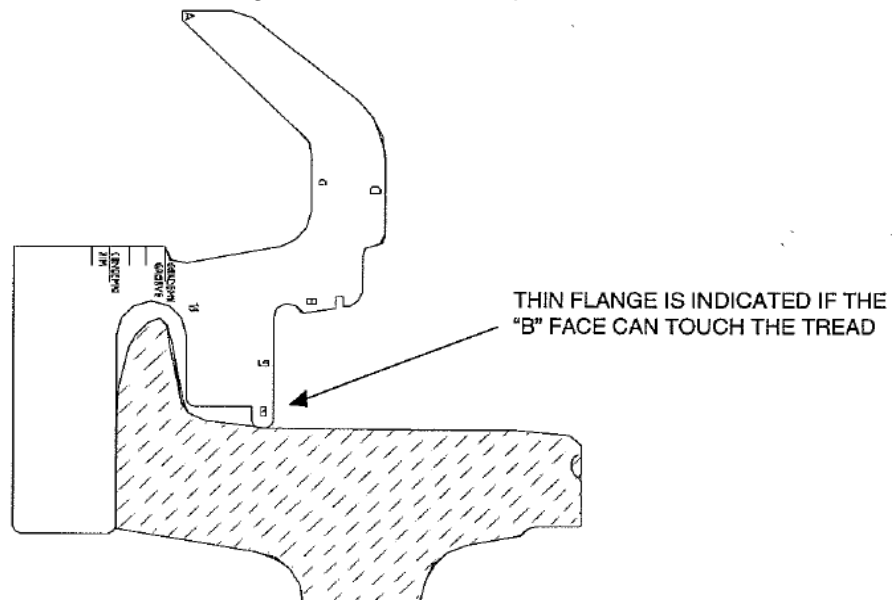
Wheel Condemn Gauge No. 300008 - thin flange indication
